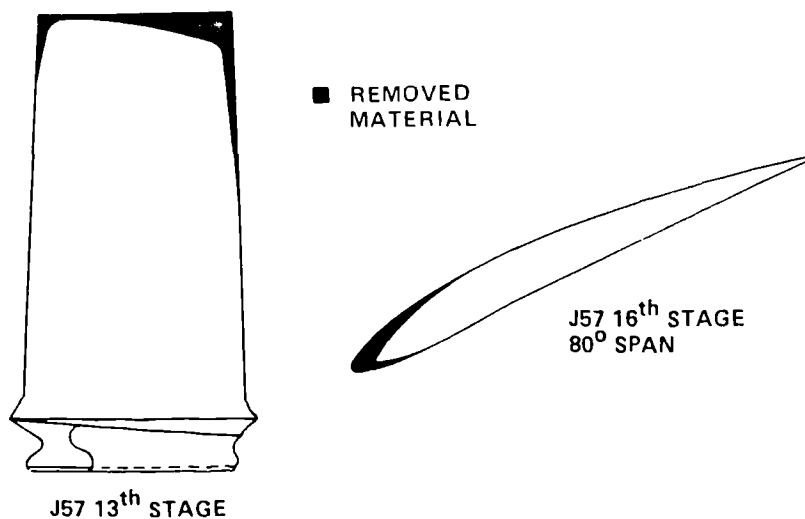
Typical Blade Erosion of The HP Compressor of a Two Spool Turbojet Aircraft Engine.
